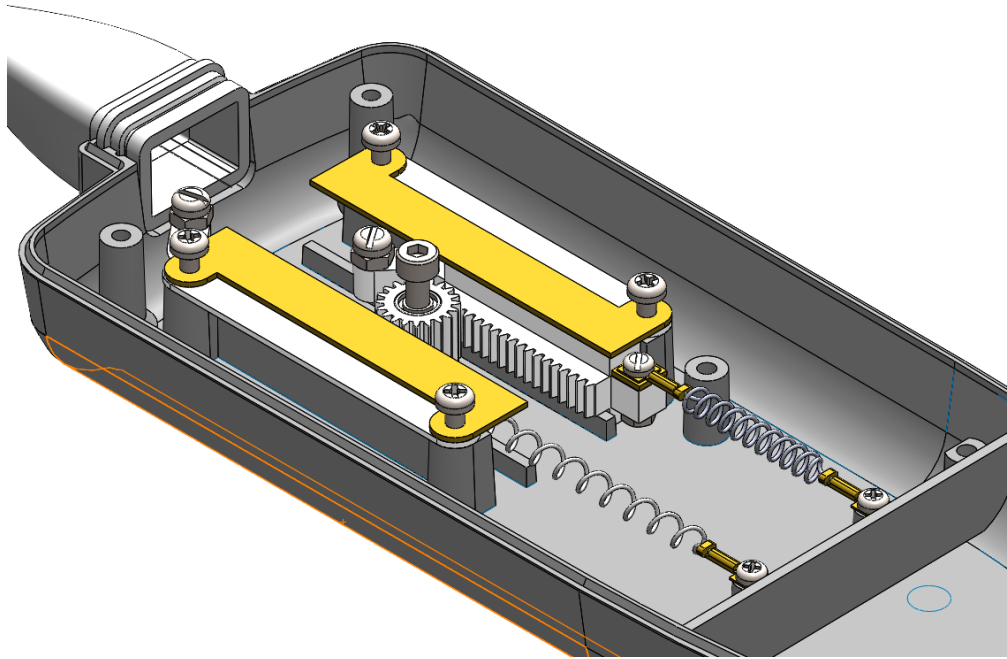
Prototype 4 Smart Bending Mechanism. The bending mechanism remained unchanged from the previous prototype.
